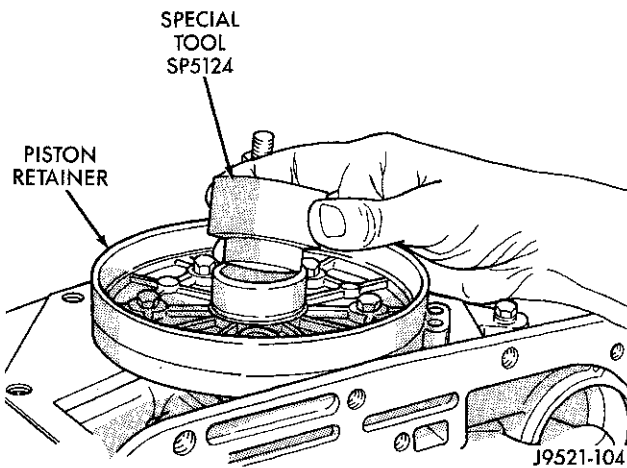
Positioning Adapter Tool In Overdrive Piston Retainer
